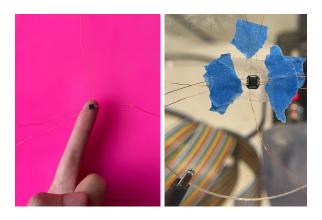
Accelerometer MPU6050 module soldered with copper wire paths.
